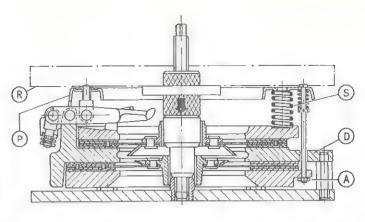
Adjusting the spring load with screws and nuts A and checking the co-planarity of disc P with respect to clutch disc D fixed to the flywheel, using steel rule R. (The arrow engraved on the fixture must be pointing downwards).
